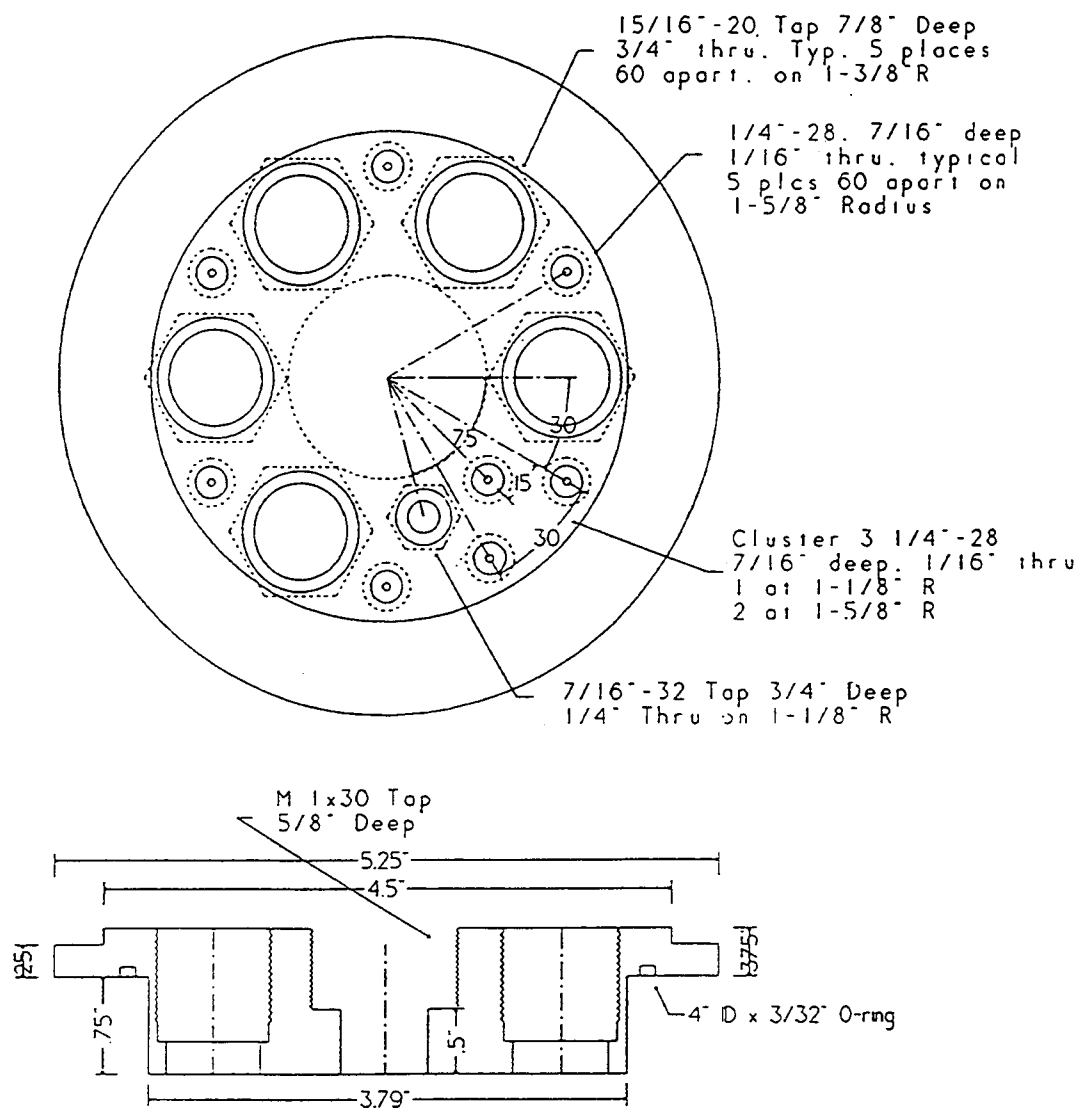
Machine drawing of Delrin reactor lid. Fittings include: center tap for stirrer motor; five electrode ports; eight ports with 1/4"-28 tap for inlet/outlet of liquids/gases; one thermometer port.
